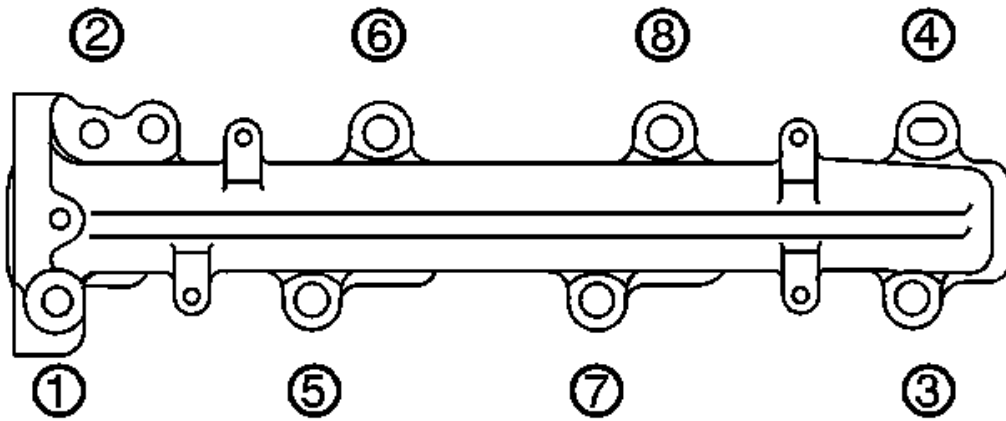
Right Exhaust Manifold Bolts And Nuts Removal & Installation Sequence
